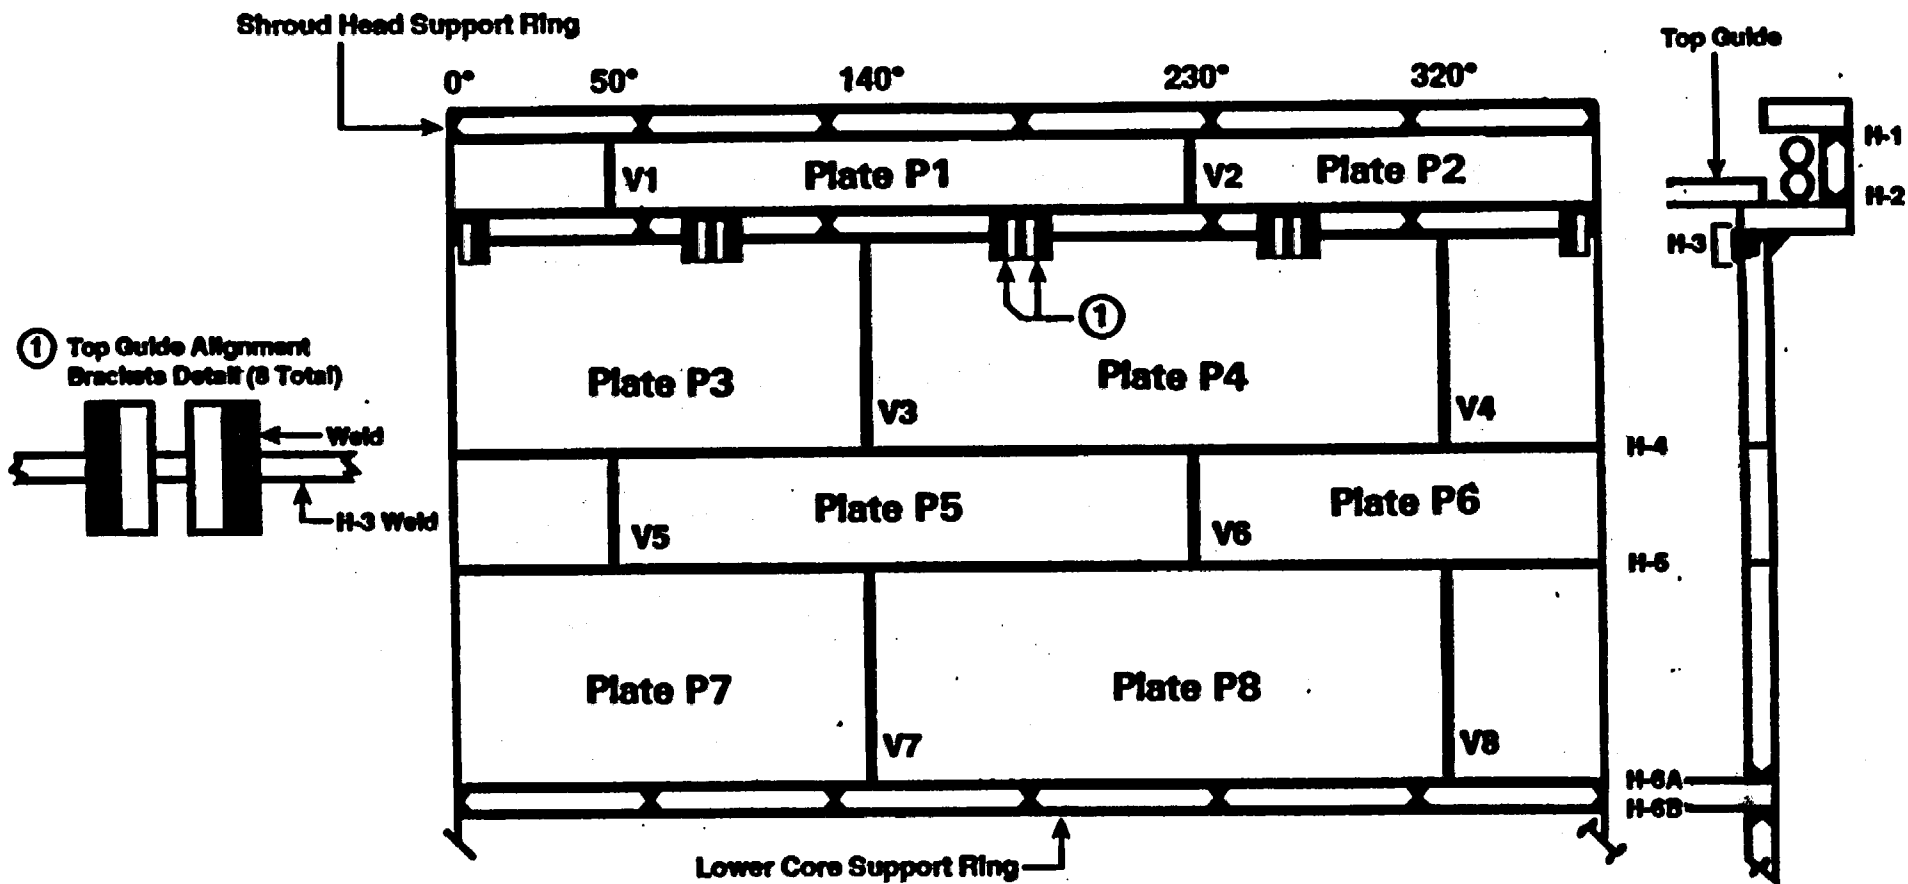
Weld and Plate Locations in the Beltline Region of the Brunswick Unit 1 Core Shroud (From CP&L)
